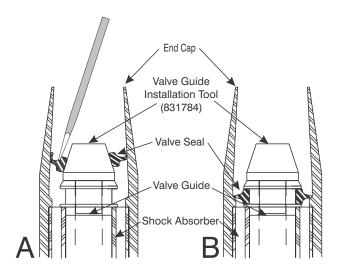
Press Valve Seal into End Cap and onto Valve Guide.
